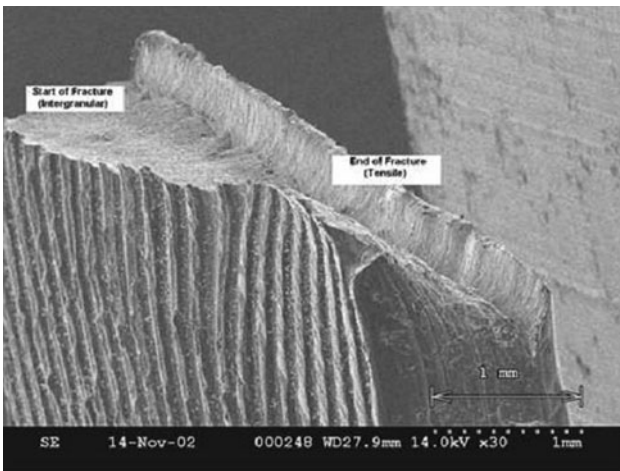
Fracture surface of a TWB fatigue specimen with weld centered at 90° to the loading direction
